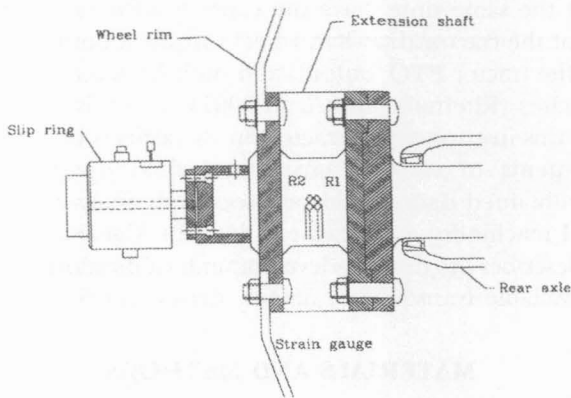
The arrangement of wheel torque transducer on drive axle shaft
